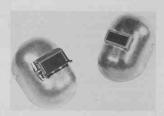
Head shield for arc welding. (Hobart Brothers Co.)
